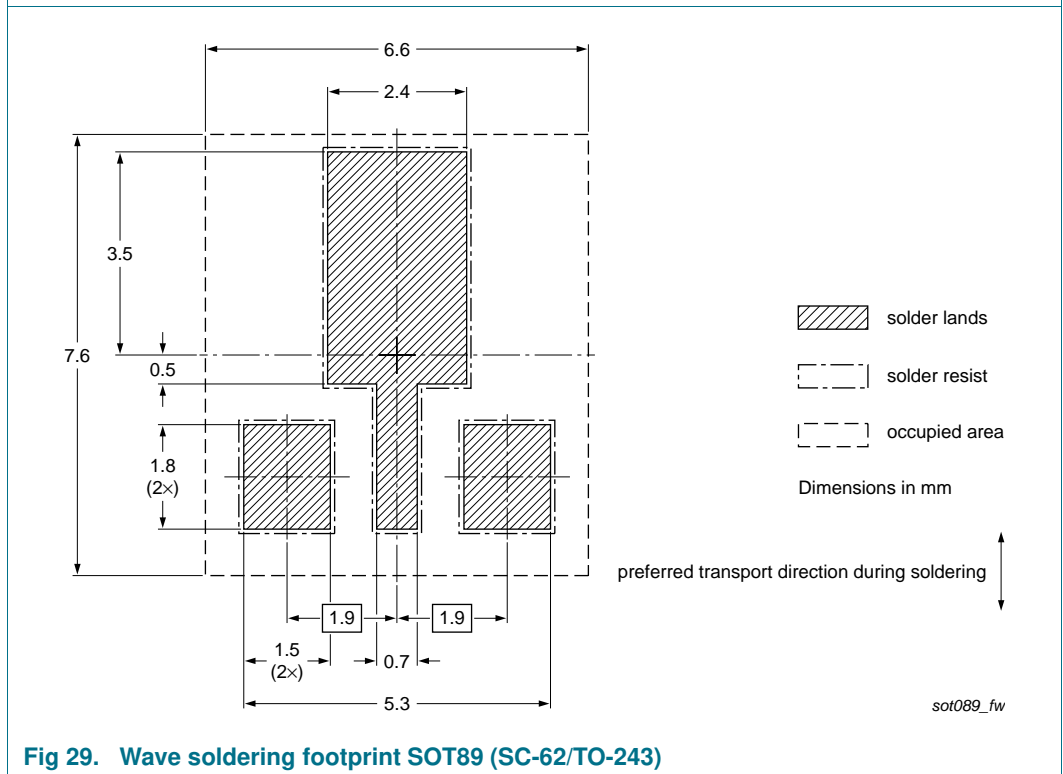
Wave soldering footprint SOT89 (SC-62/TO-243)
